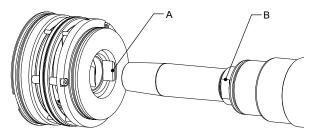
A) Anti-rotation device of the mechanical seal B) Flat edge at the shaft
